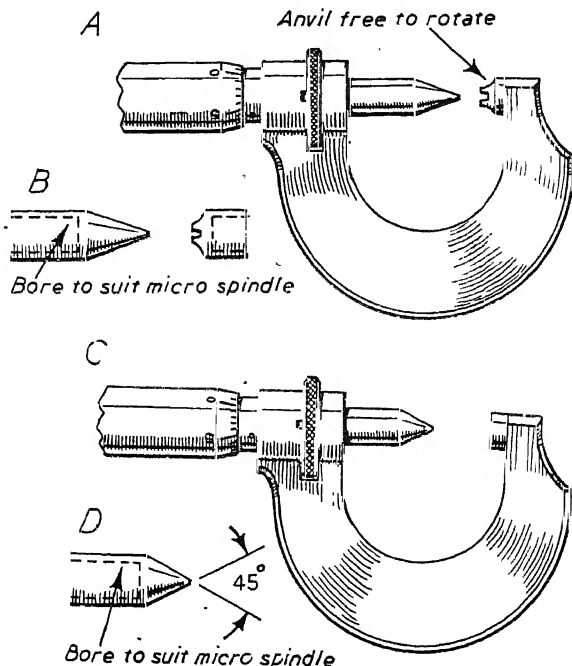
A, micrometer for screw thread measuring; B, anvils for converting ordinary micrometer for screw thread measuring; C, micrometer for measuring depth of thread and thread core diameter; D, anvil for converting ordinary micrometer for depth of thread and thread core diameter measuring.
